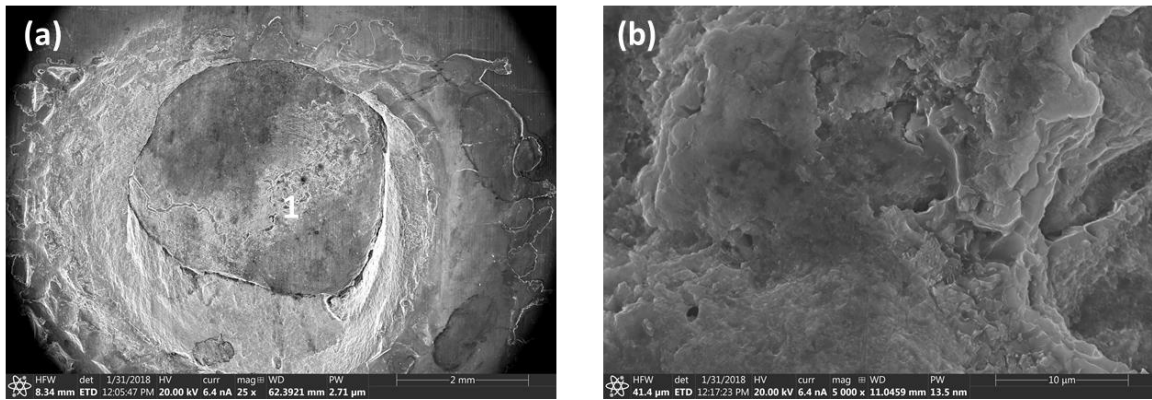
(a) macrostructure, and (b) zoomed-in image of the IMCs formed on the top surface of aluminum sheet due to over-melting when long welding time of 200 ms was used
